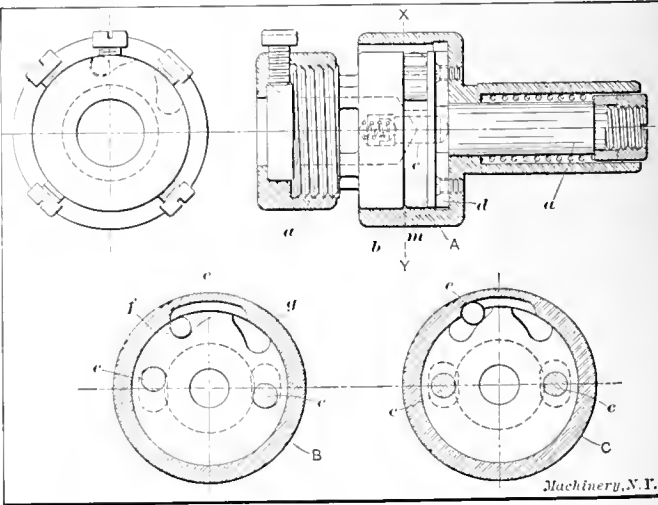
Illustration showing Operating Parts of Releasing Button Die Holder
